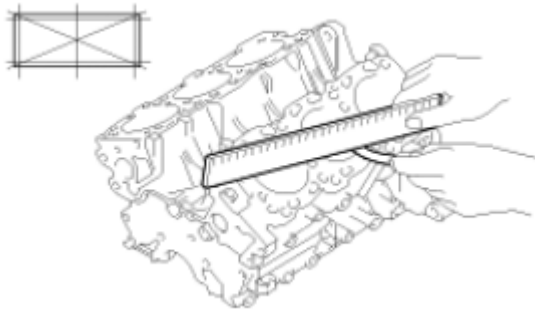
Measuring Surface Contacting Cylinder Head Gasket For Warpage
